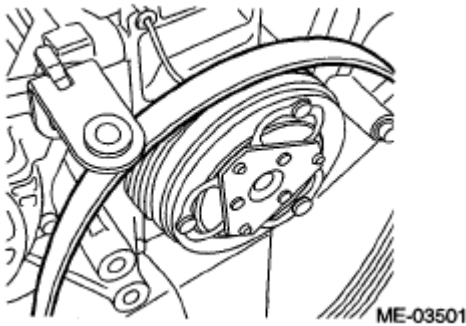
Identifying Rear Side Belt On A/C Compressor Pulley
